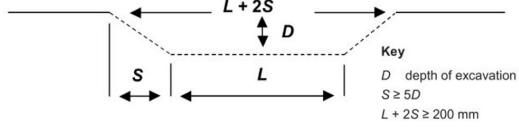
Schematic of the weld prep used to generate the welding path taken from BS 15594:2009 [11]
